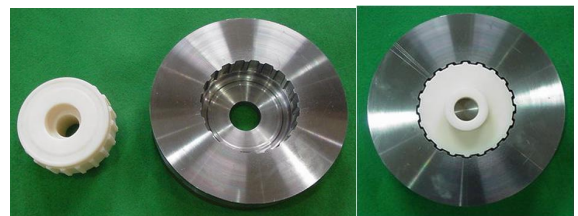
Shape of lower & upper die(Left), Tooth arrangement(Right)
